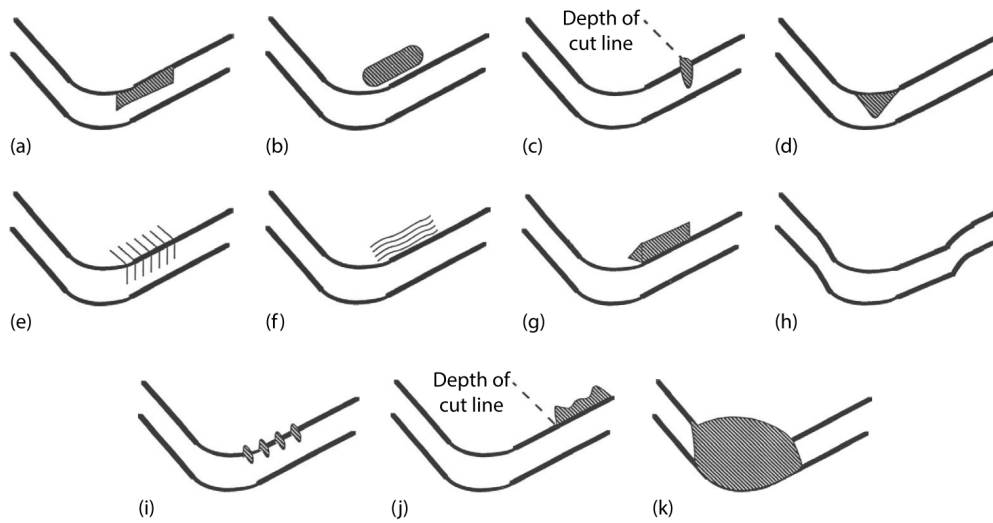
Types of wear on cutting tools: (a) flank wear; (b) crater wear; (c) notch wear; (d) nose radius wear; (e) comb (thermal) cracks; (f) parallel (mechanical) cracks; (g) built-up edge; (h) gross plastic deformation; (i) edge chipping or frittering; (j) chip hammering; (k) gross fracture [5]
